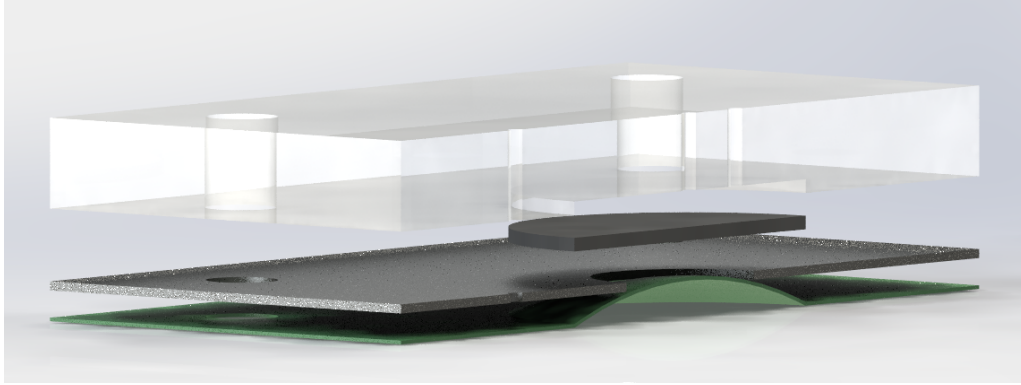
Exploded view of Flange Layer, Rubber Seal and Green Membrane
